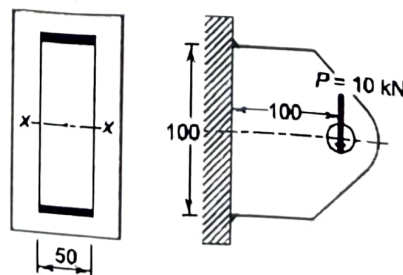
Welded Bracket (All dimensions are in mm)
